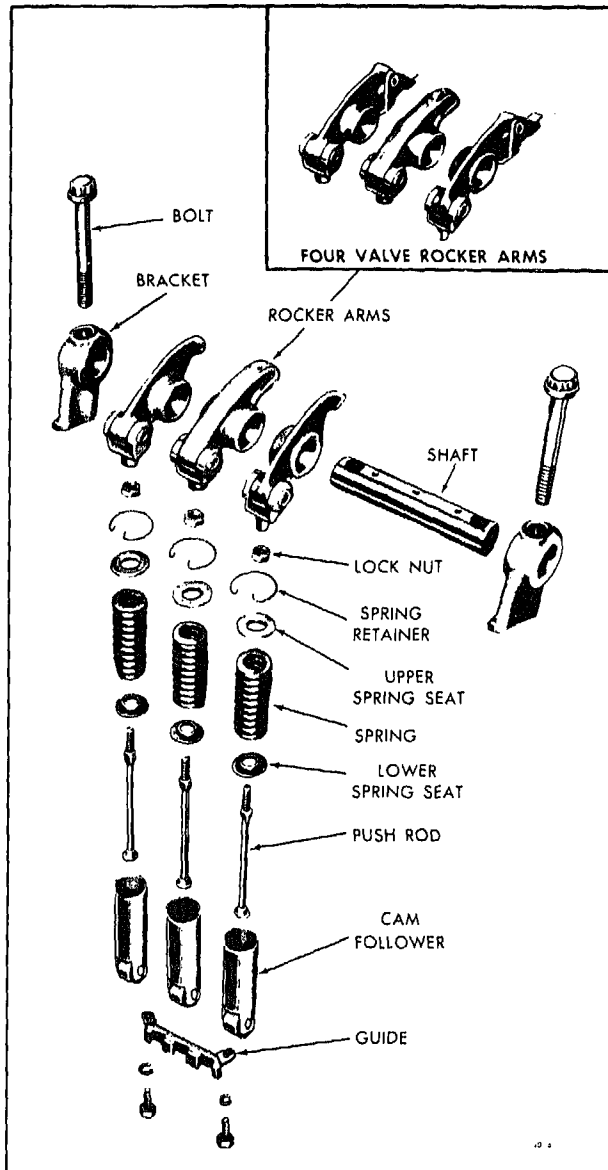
Valve and Injector Operating Mechanism Details and Relative Location of Parts
